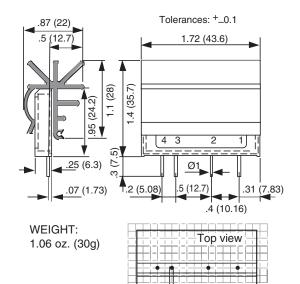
LS relays with HS1; dimensions in inches (mm)
